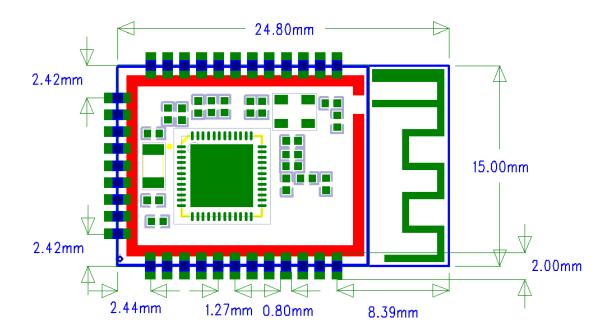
RF-BM-ND04 Mechanical Drawing and Packaging Size
